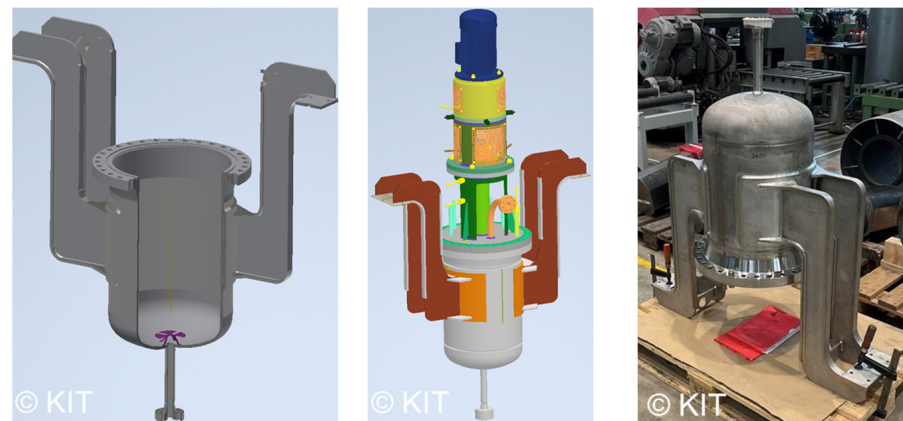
Pump tank for the liquid lead loop (left: 3D drawing; center: 3D model including immersed pump; right: after construction, photo: M. Lux/KIT).
